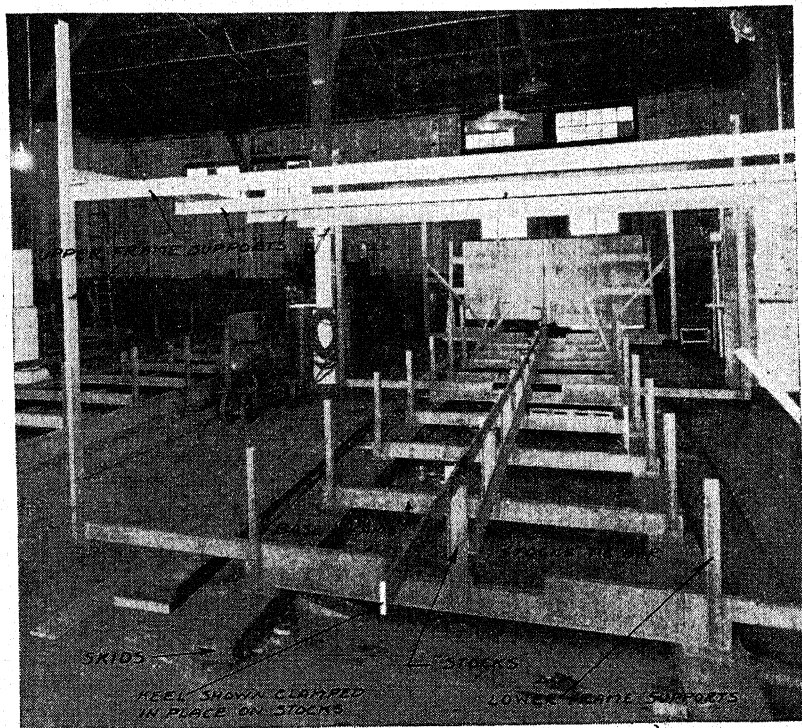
Jig for fabricating steel cruiser—keel clamped in place.
